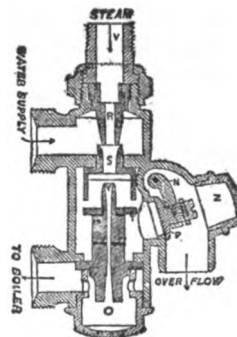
Sectional view of one type of injector. When steam is turned on through V, it creates a suction in the narrow parts R and S, which draws water in through the supply pipe and starts it on its way into the boiler.
